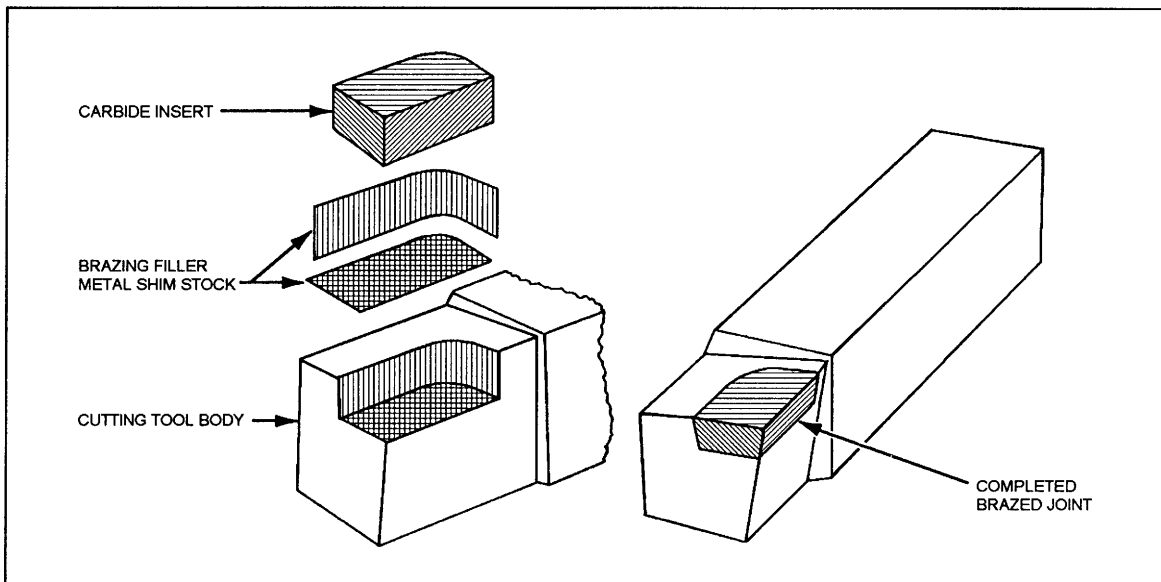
A machining tool bit showing how the carbide insert is brazed to the tool bit body using preplaced brazing filler metal shims.
